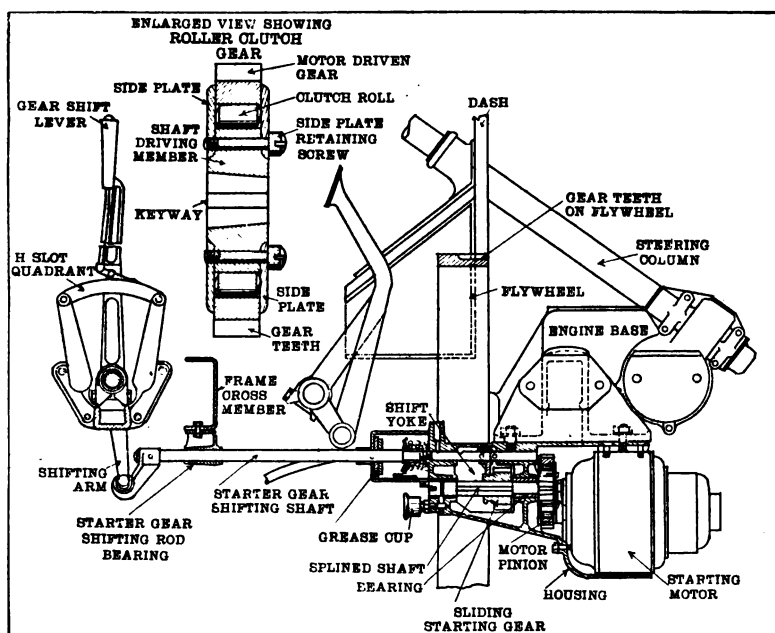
Showing Unconventional Starting Pinion Shifting Arrangement Used on FIAT Automobiles.
